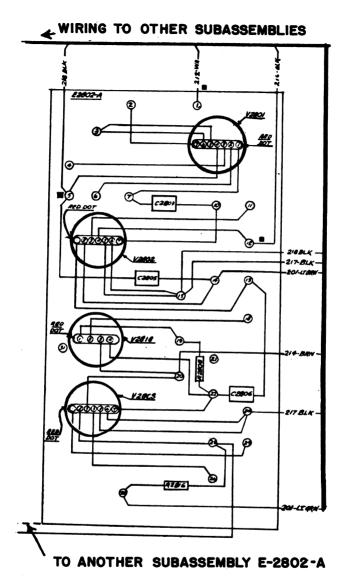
Wiring diagram of subassembly E-2802-A.
